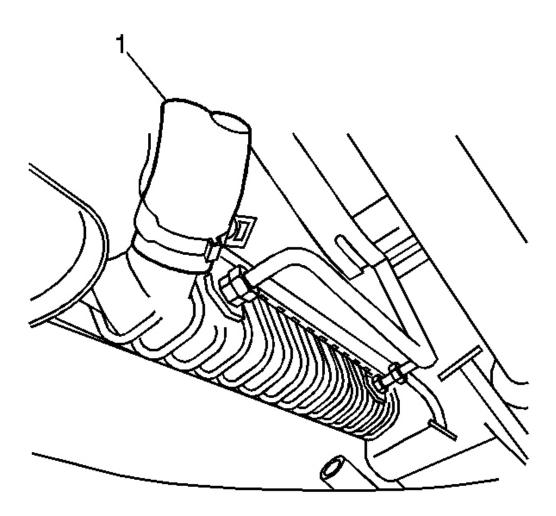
View Of Radiator Hose Courtesy of GENERAL MOTORS CORP.
